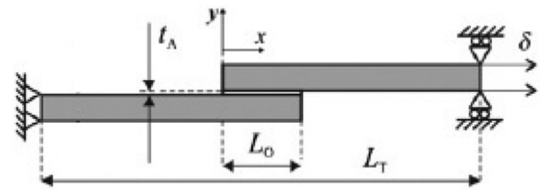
Geometry and dimensions of studied Single Lap Joint specimens [28].
